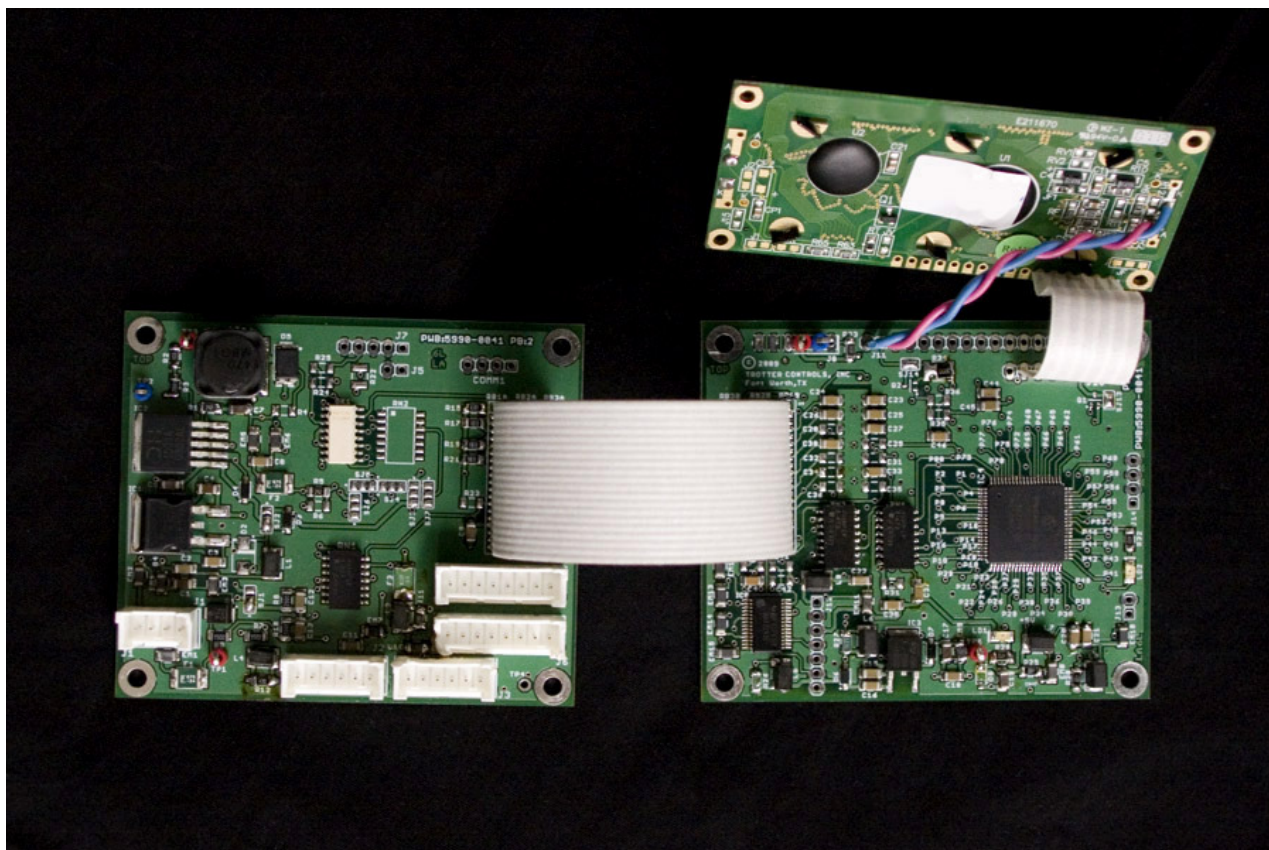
~ DMS processor board, power I/O board, and display board shown ready for final installation in the chassis.
